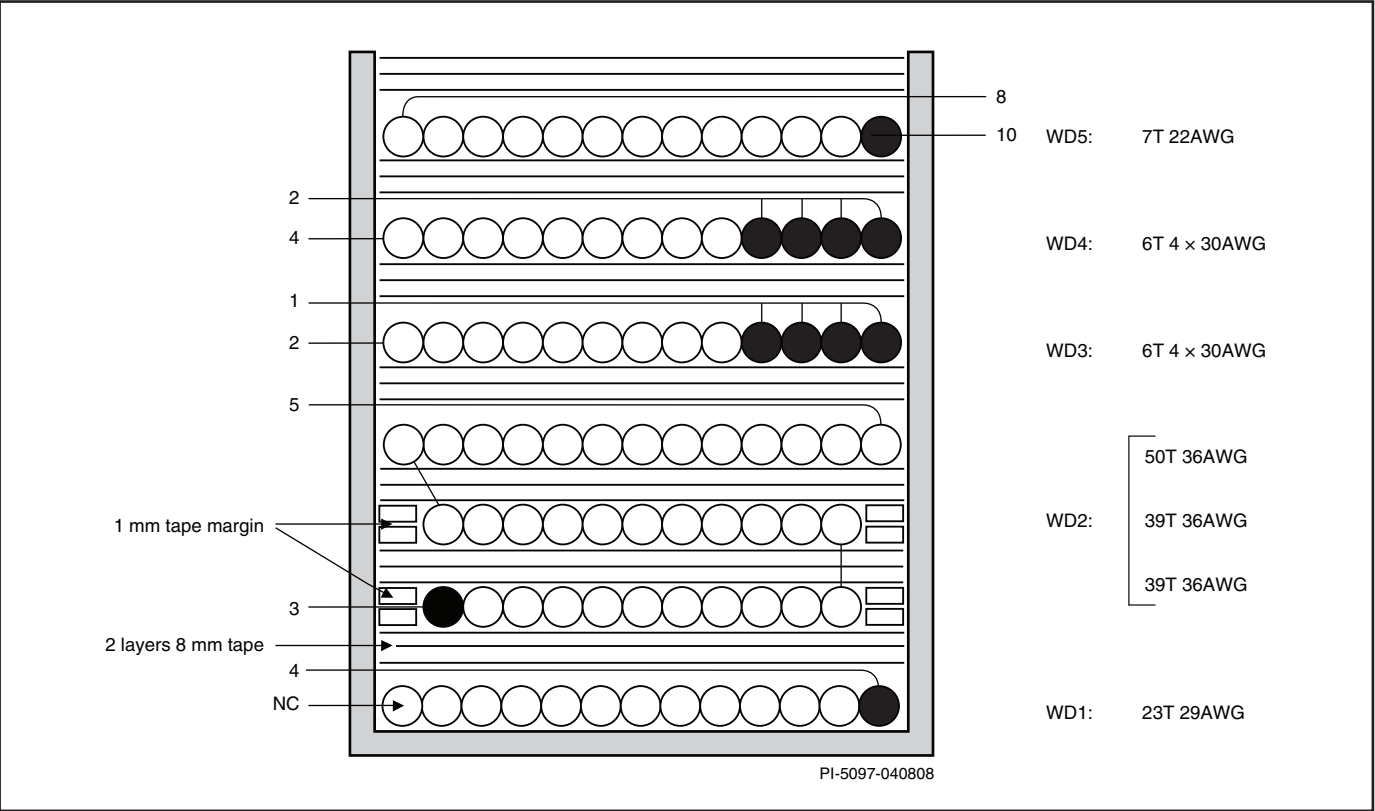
Transformer with Additional Bias Winding and Shield Winding Build Diagram.
